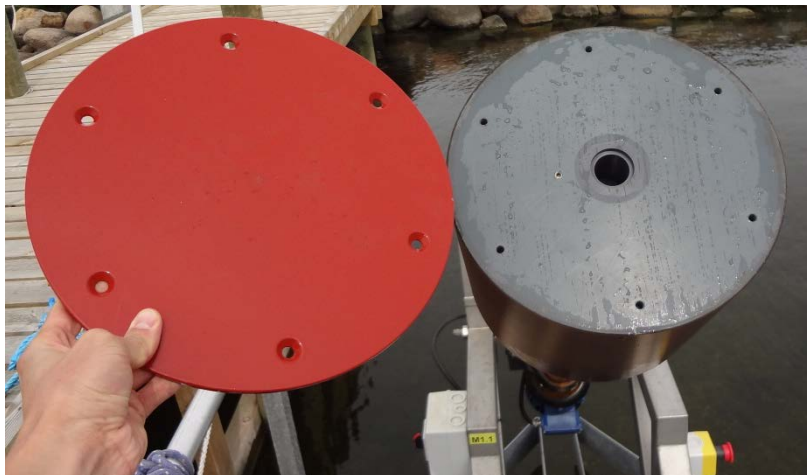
A. Bottom disk removed after unscrewing the six screws, which kept it in place.
